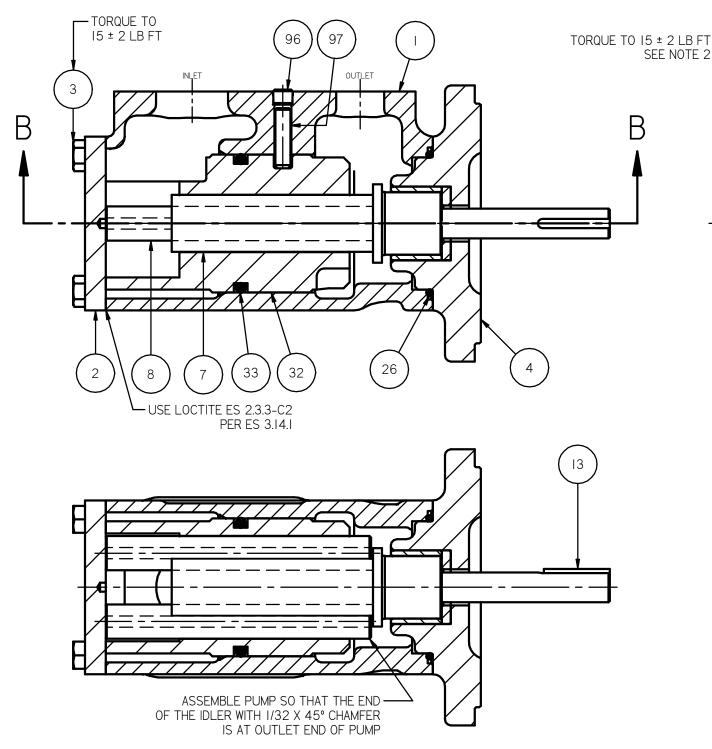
IRON CASE C-FACE MOUNT EIC ASSEMBLY
